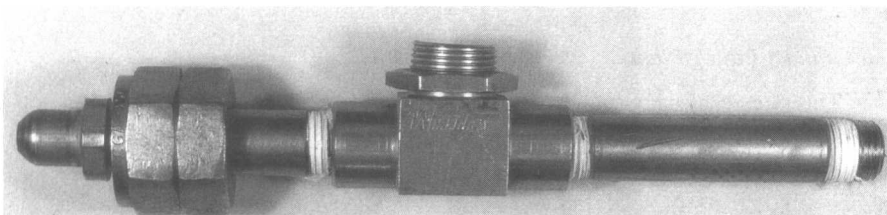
A ball valve was installed between the oxygen cylinder valve and the regulator to simplify purging.
